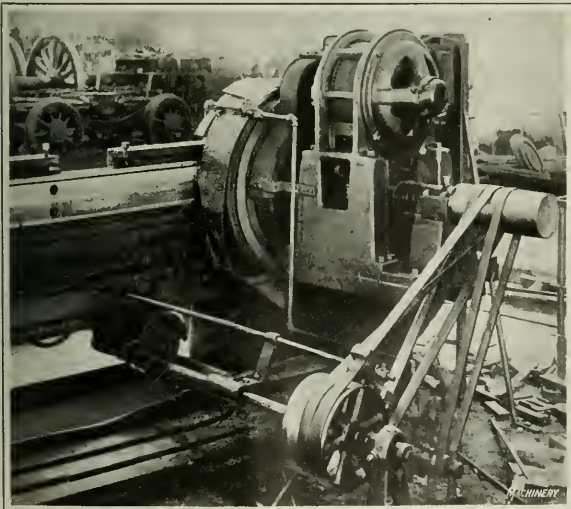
Guide Grinder driven by 10-horsepower Induction Motor
